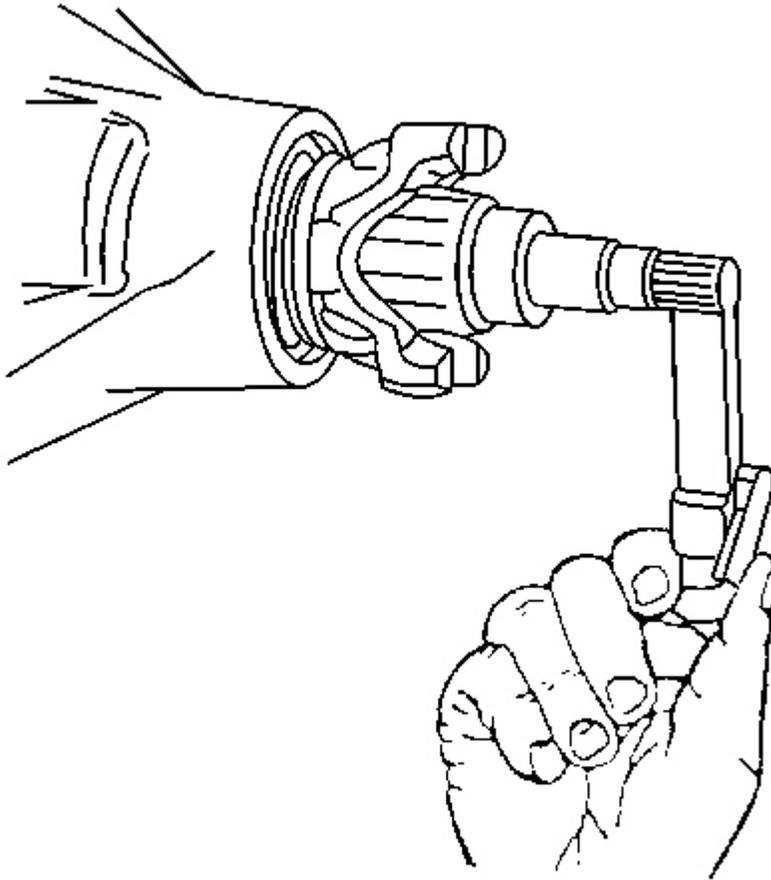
Measuring Pinion Rotation Torque - Front Axle
